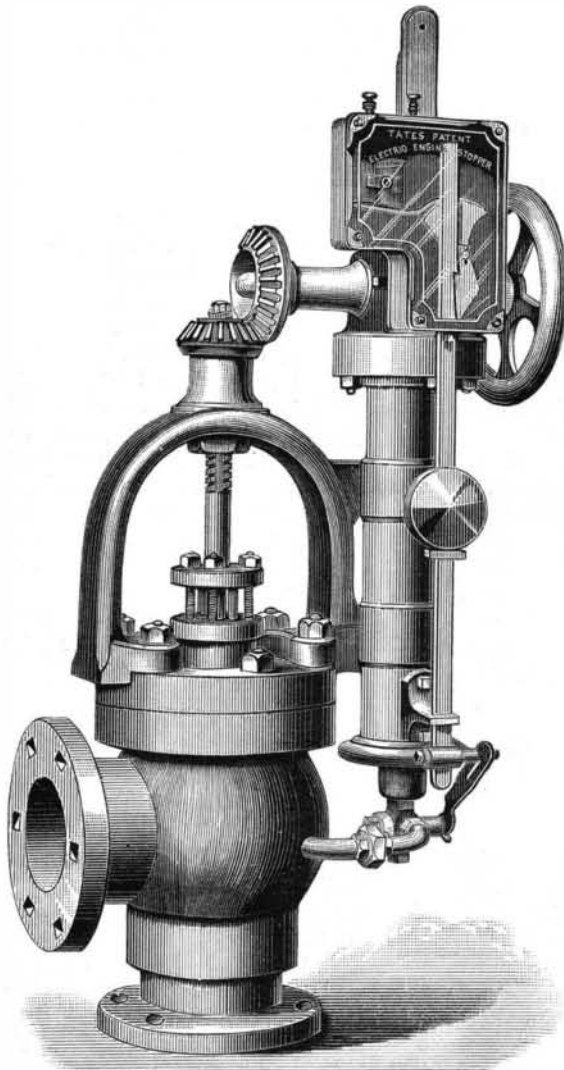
ELECTRICAL STOP DEVICE FOR STEAM ENGINES.
